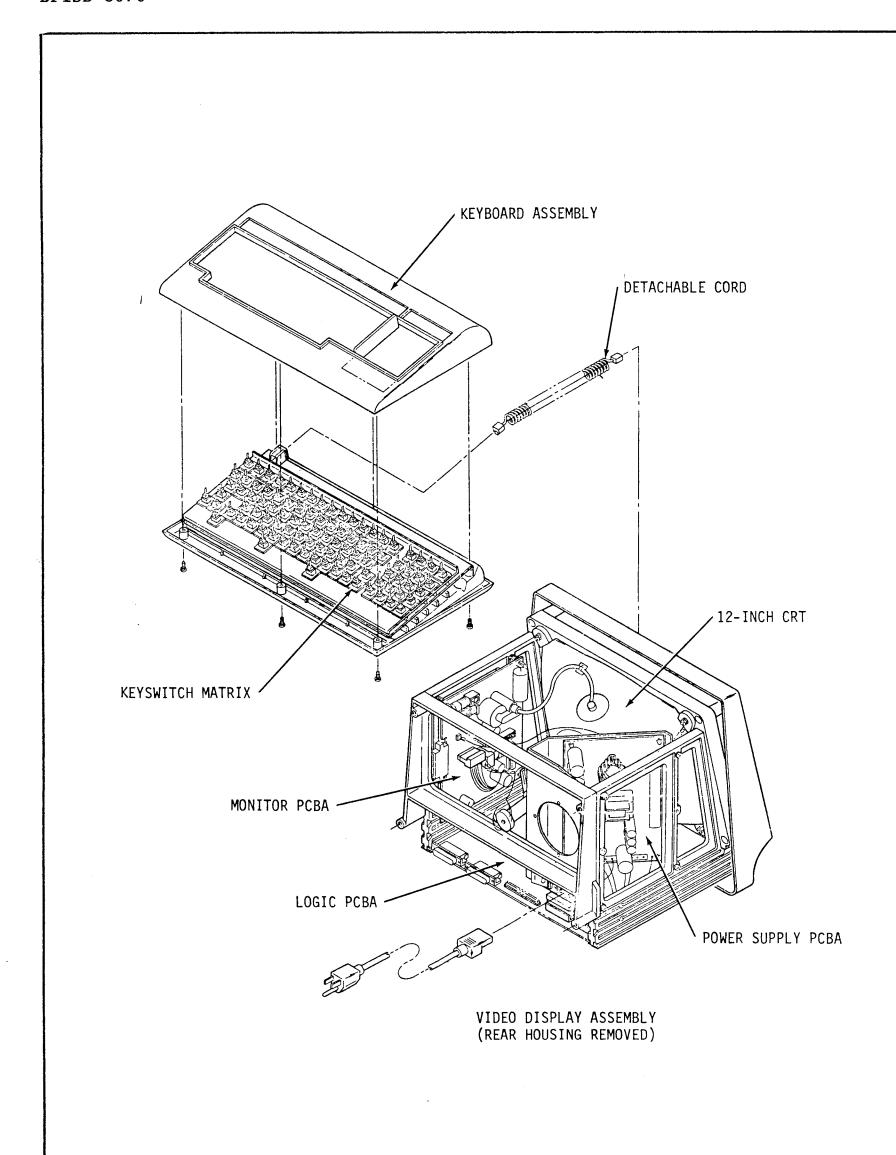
Major Assemblies and Related Components, Model 4309 EVDT
